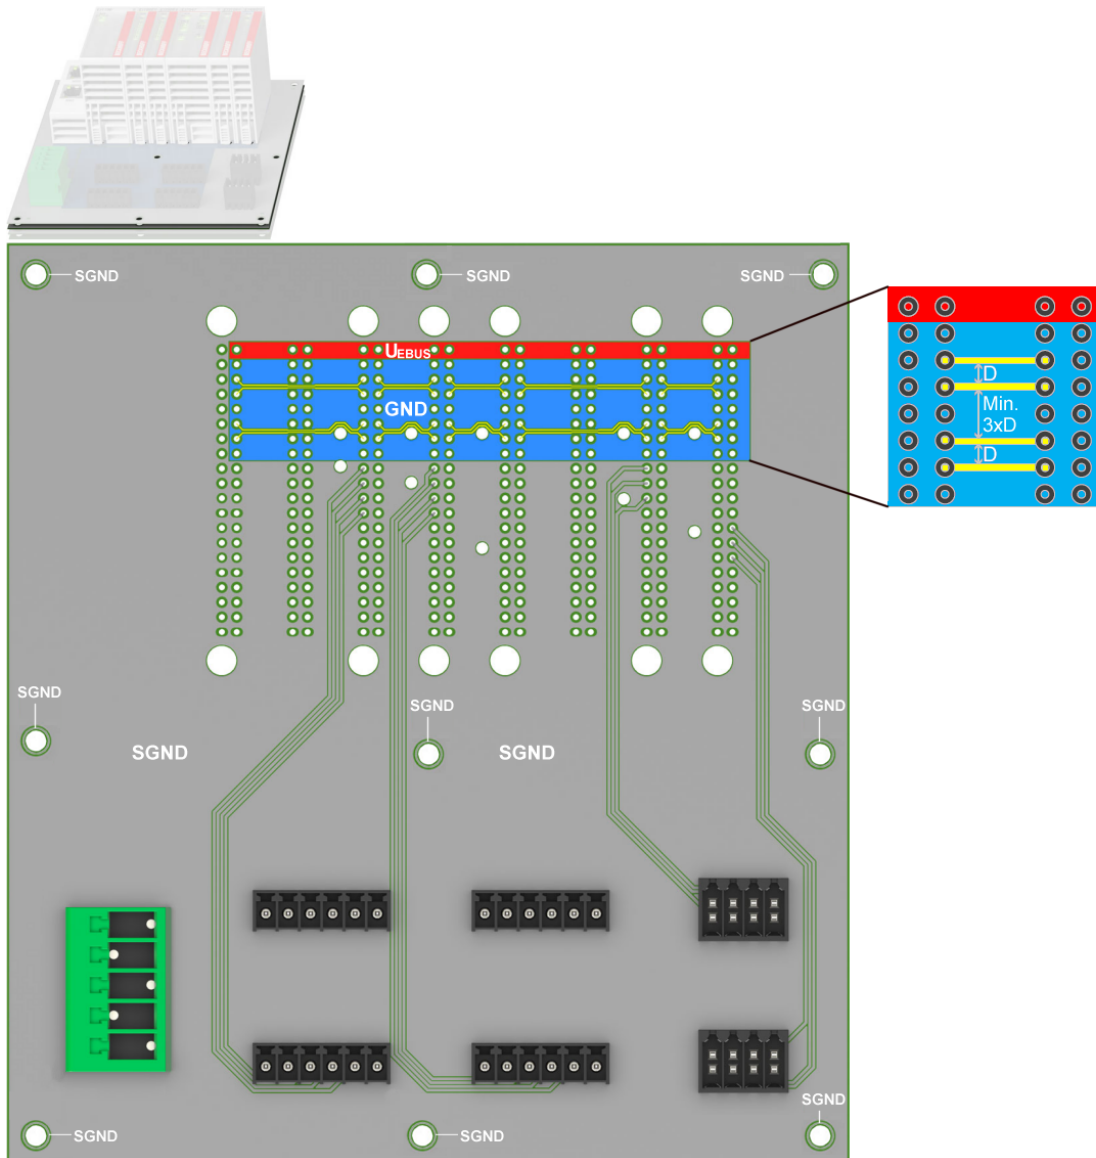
Example for routing the inner layer1 of a four-layer PCB
